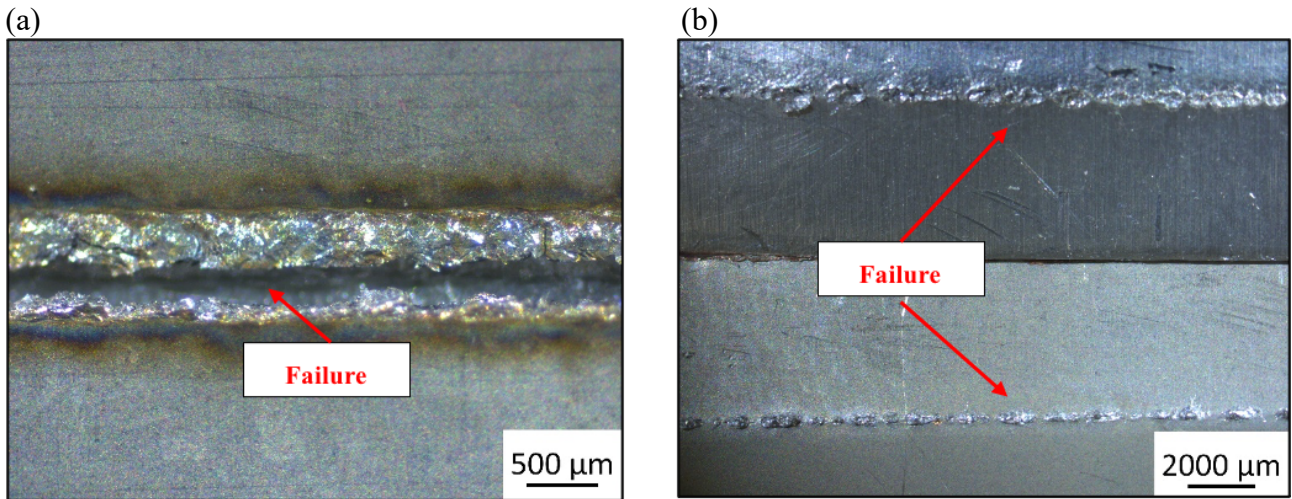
Example of breaking mode, failure near the weld seam (a) and failure at the interface between the sheets(b).
